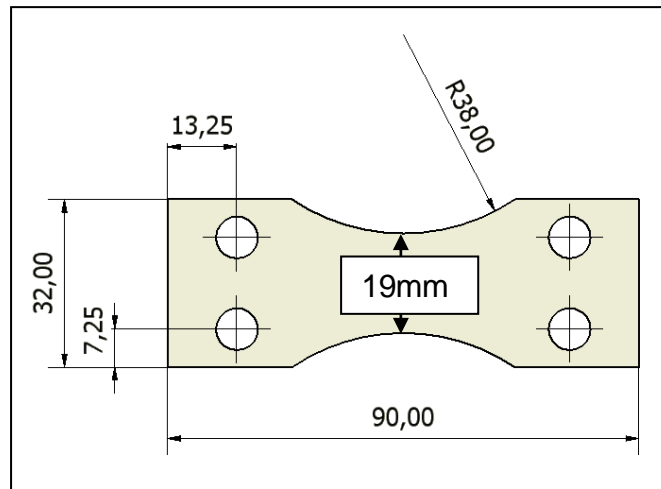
Fatigue dimensions of specimens (ASTM E466-96)
